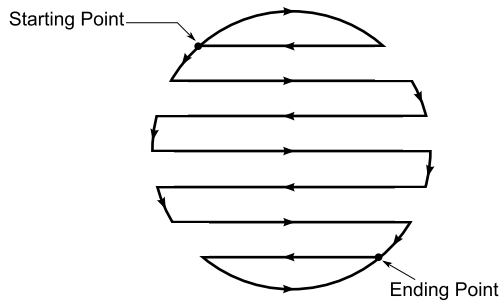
Basic tool path in the X-Y plane for cylindrical holes. The “forward” direction is shown.
